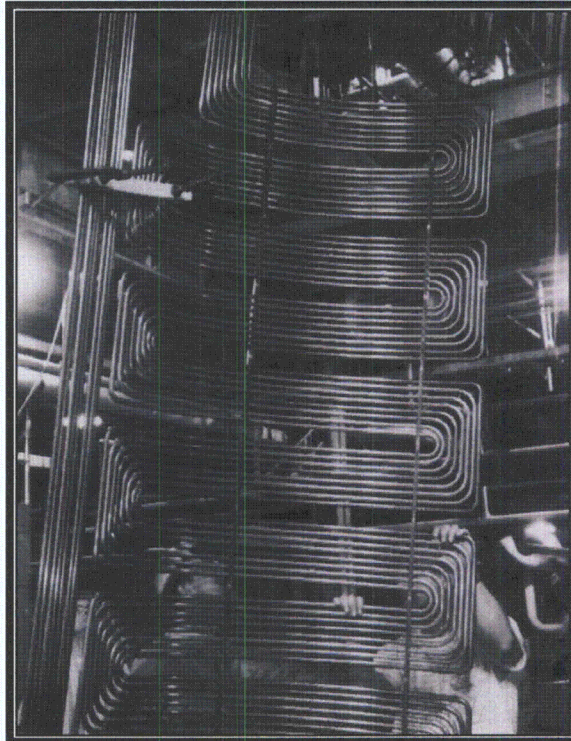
Typical tube bundle section of steam generator (Courtesy DECo)
